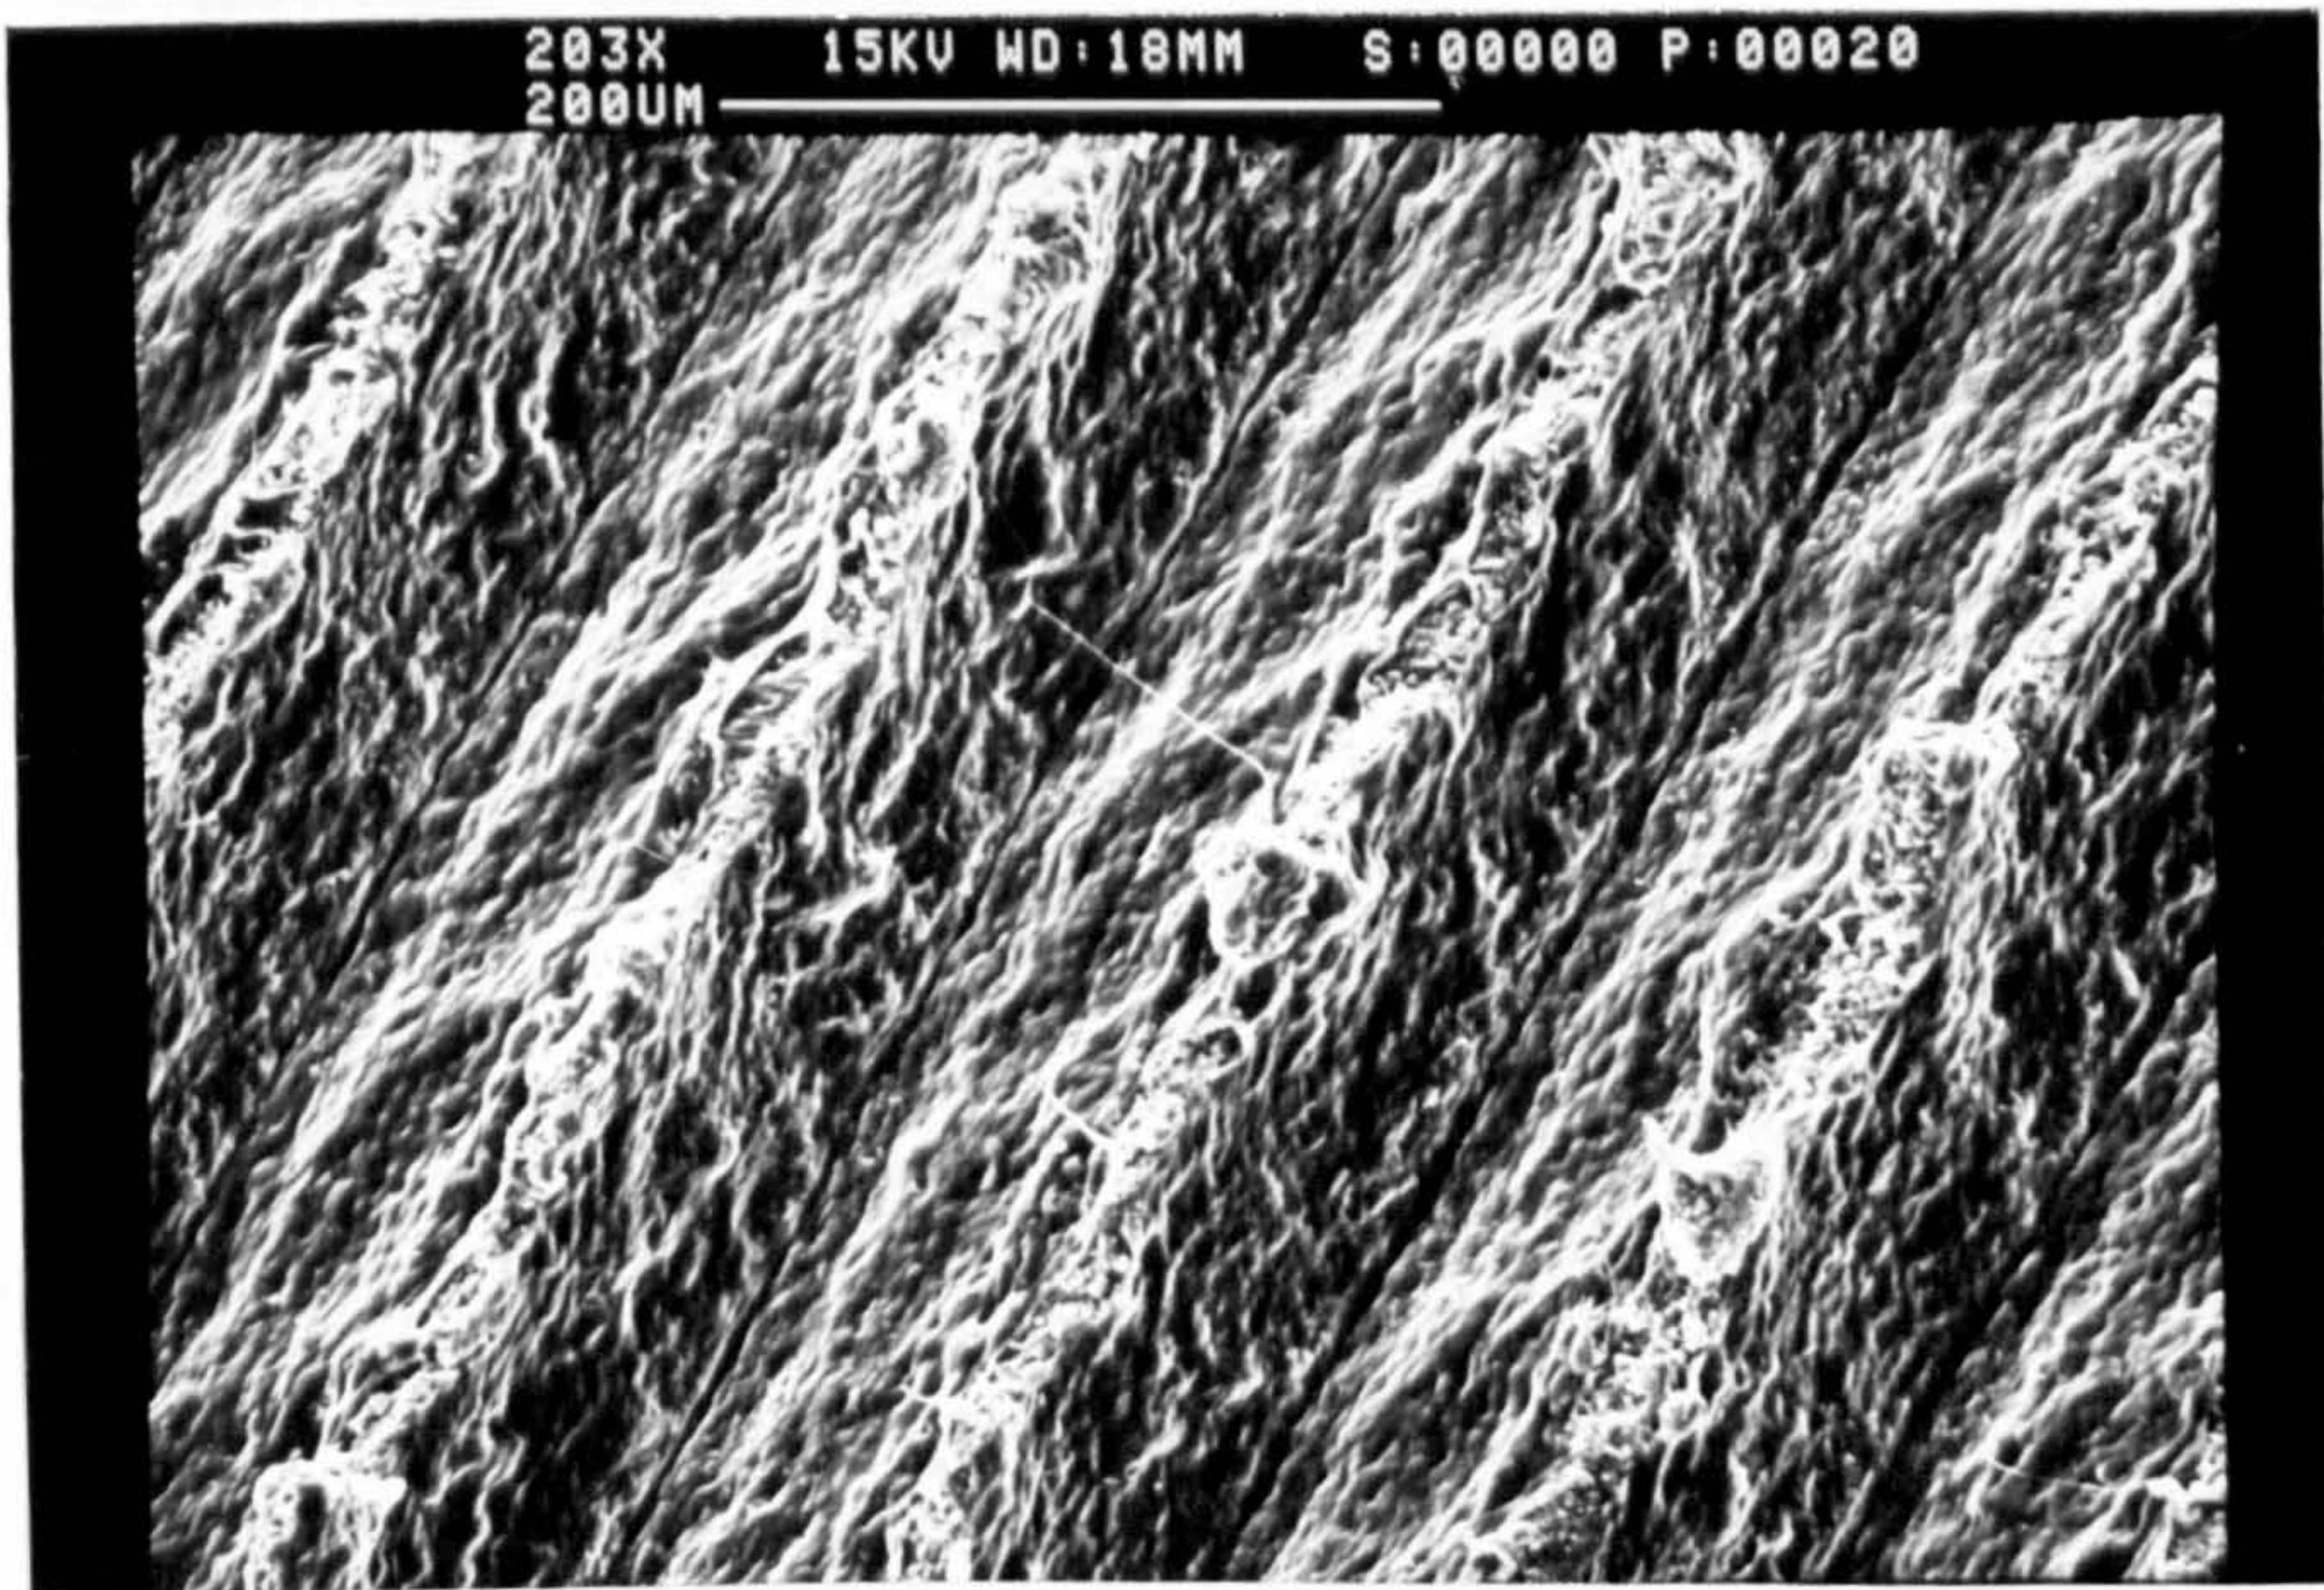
PVC surface machined at  $-20^\circ$  rake angle, showing fibrillar structure. (Speed = 150 m/min, feed = 0.14 mm/rev)
